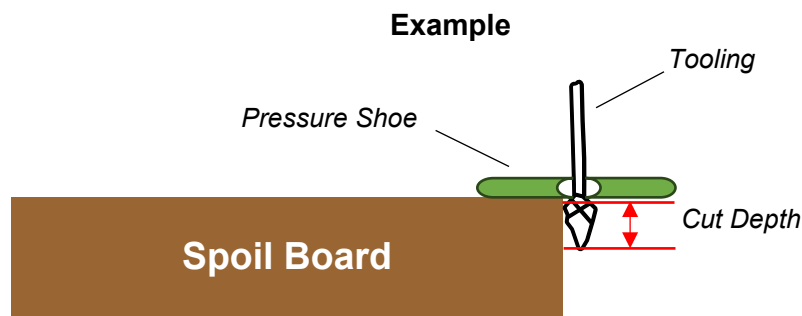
Example of Adjusting Cutter Depth Using the Gliding Pressure Shoe System
